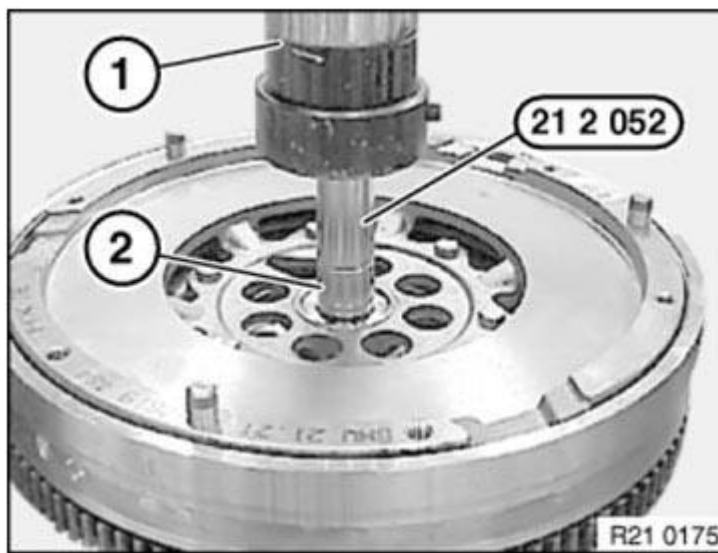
Pressing Roller Bearing Into Dual-Mass Flywheel
